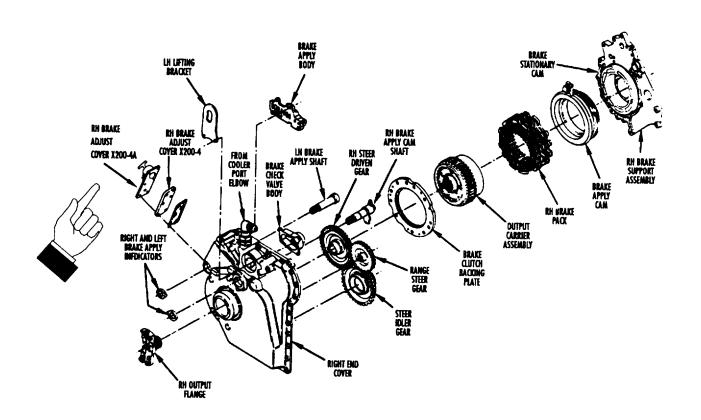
Exploded View of Major Components Right End Cover Assembly
